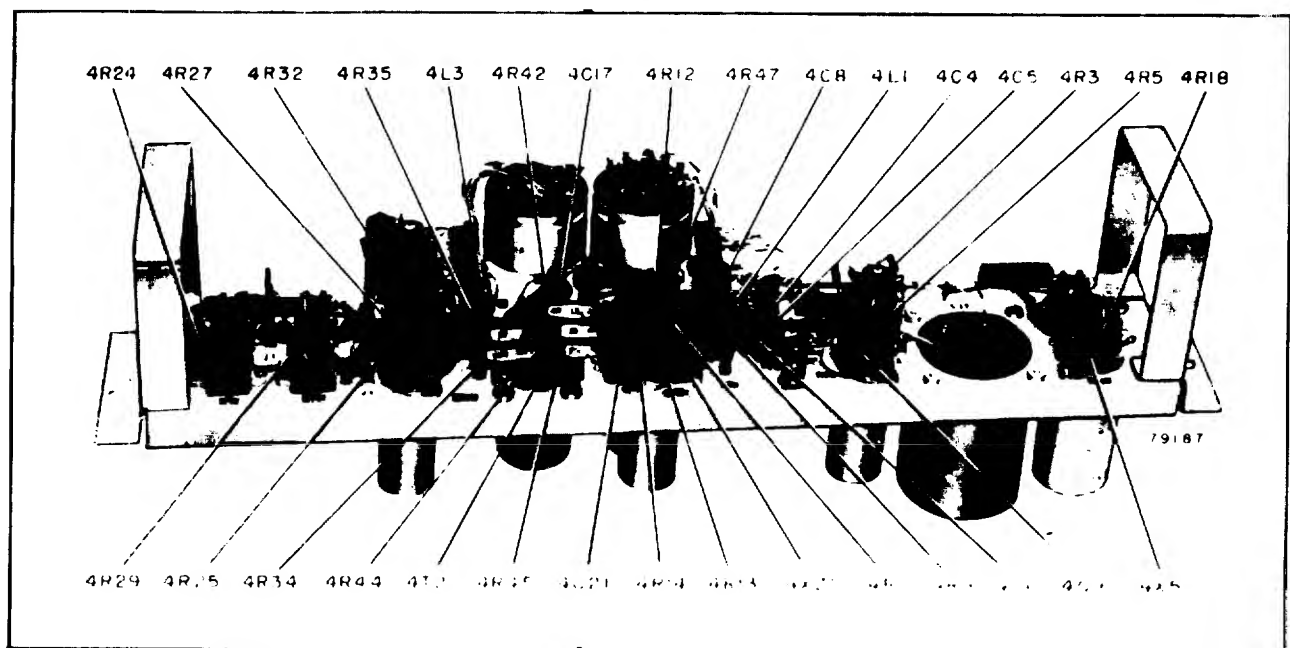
Baseband Unit — Rear View, Dust Cover Removed
